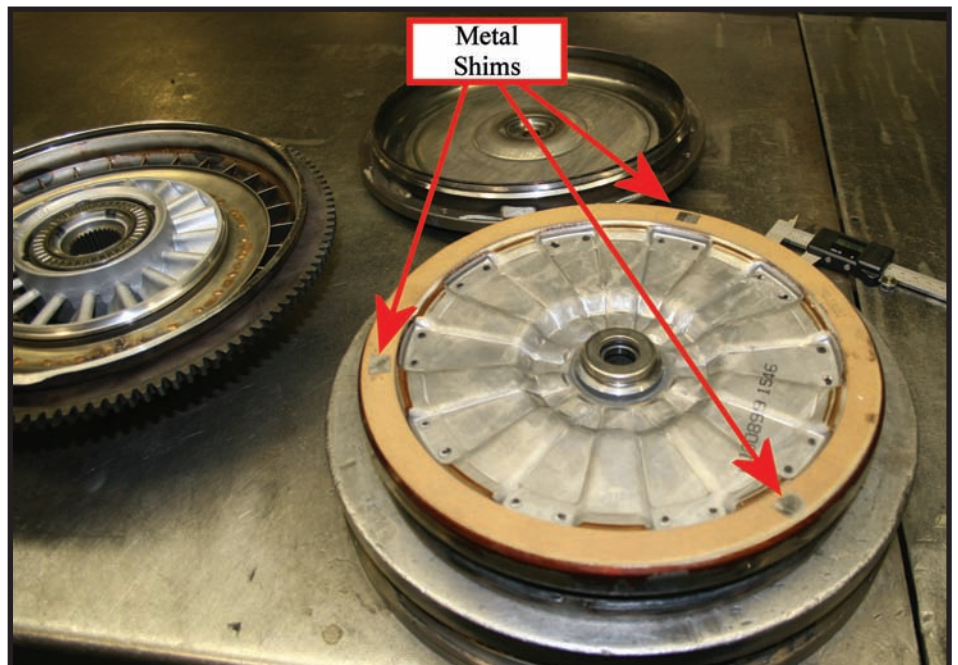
A: You can check the converter clutch clearance directly by placing three shims on the clutch, temporarily assembling the converter shell, and checking the clutch clearance. Just make sure you remove the shims before welding the clutch housing!
